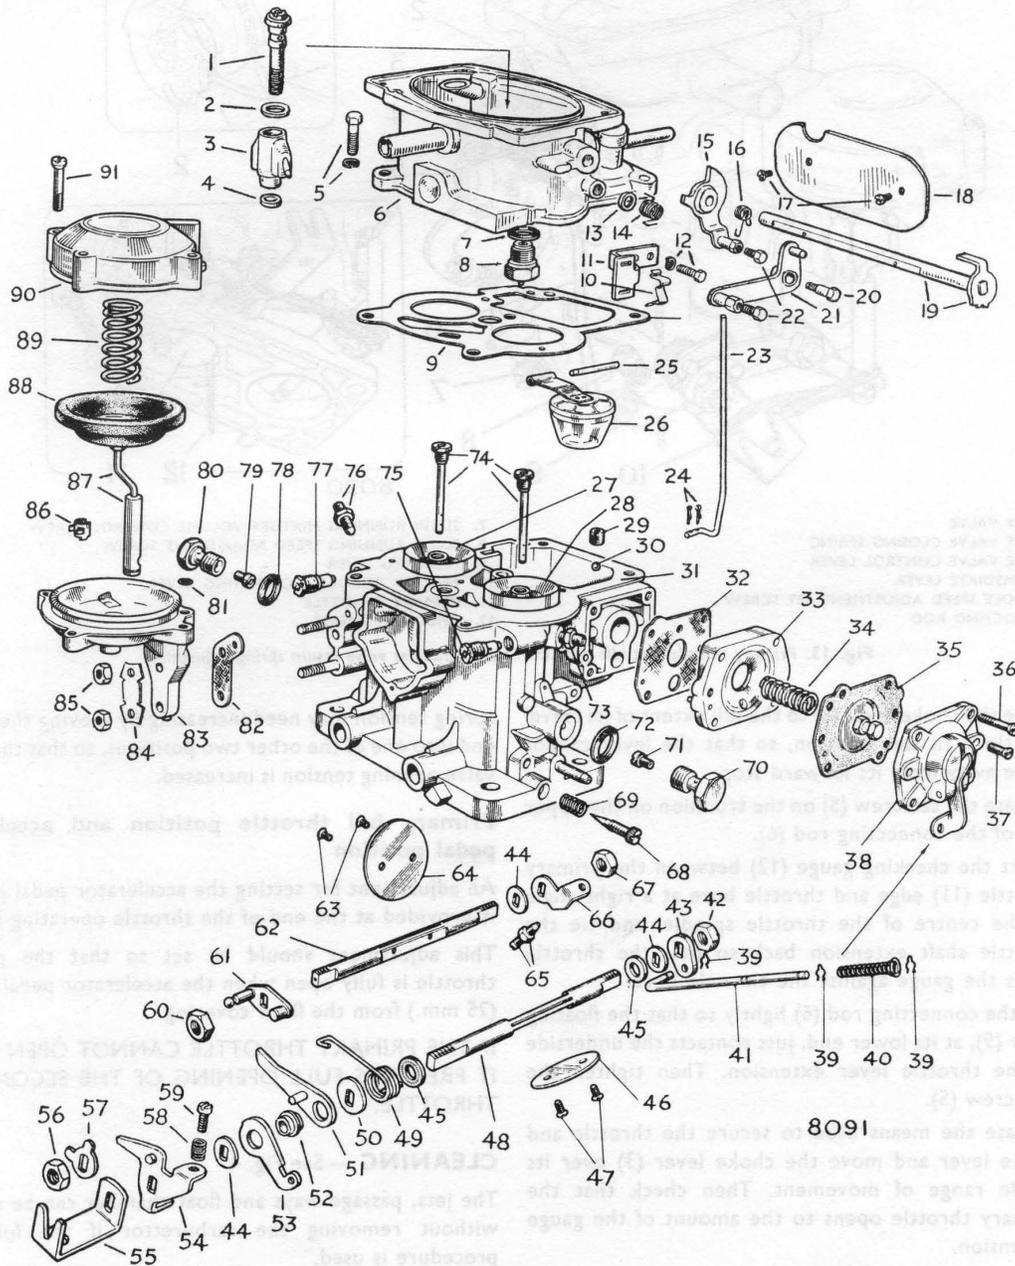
Solex B.32 P.A.I.A.S. carburettor — exploded view
